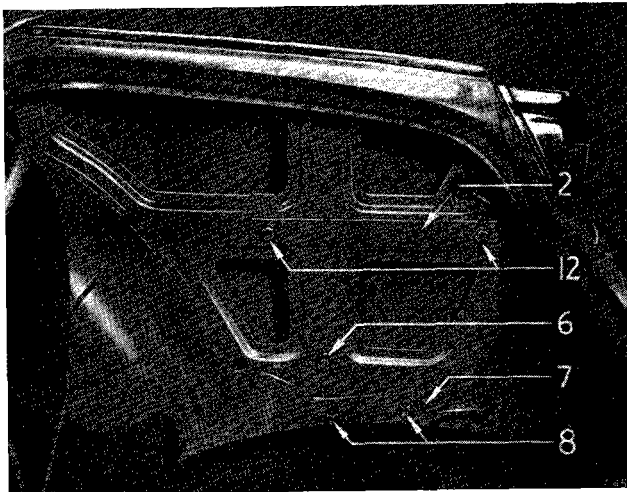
Rear bumper attachment (Spitfire 4 and Mk. 2)
